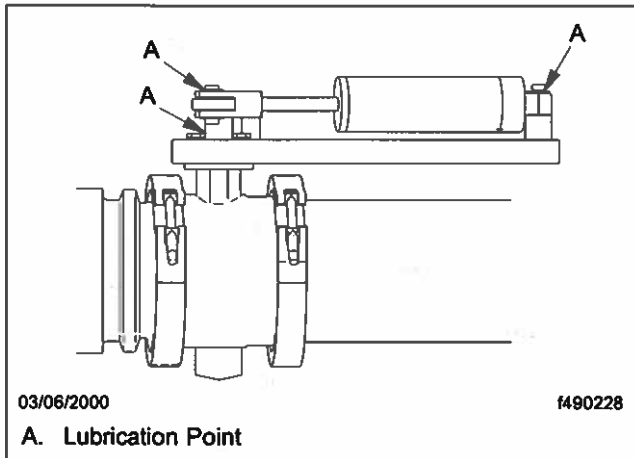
, Pacbrake Exhaust Brake and Air Cylinder
